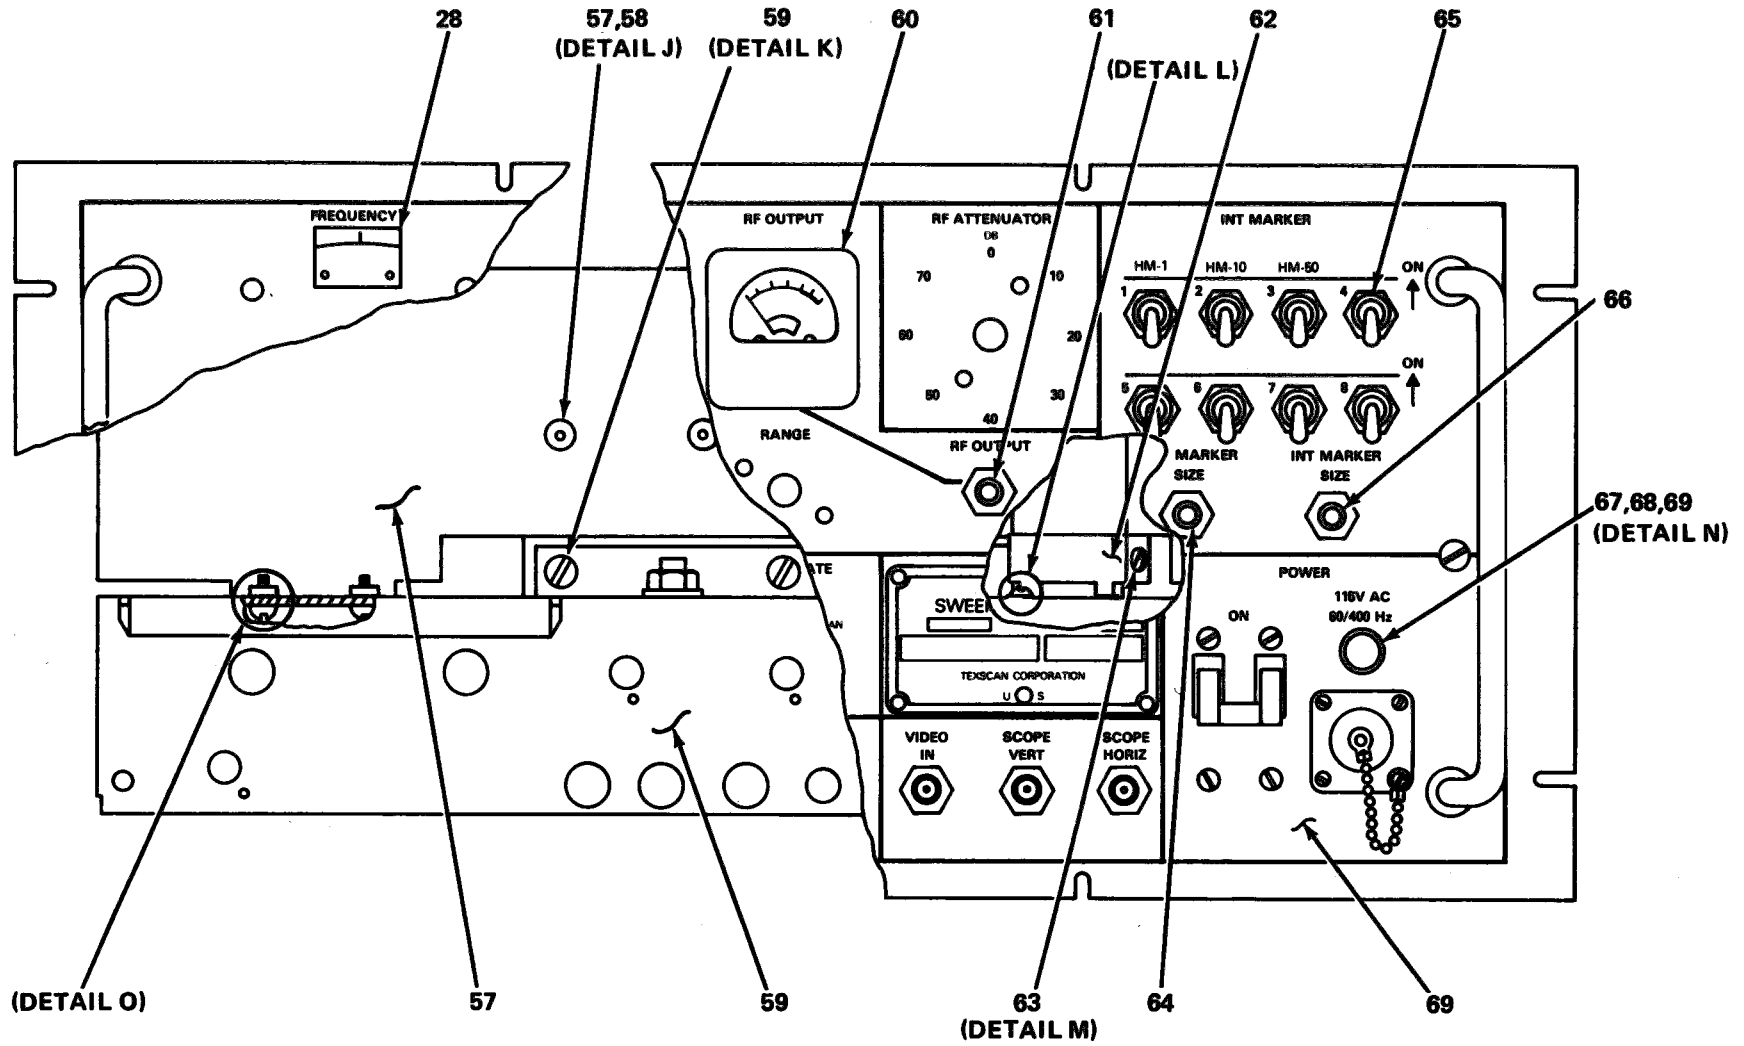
Main Chassis Subassembly (Sheet 2 of 3)
